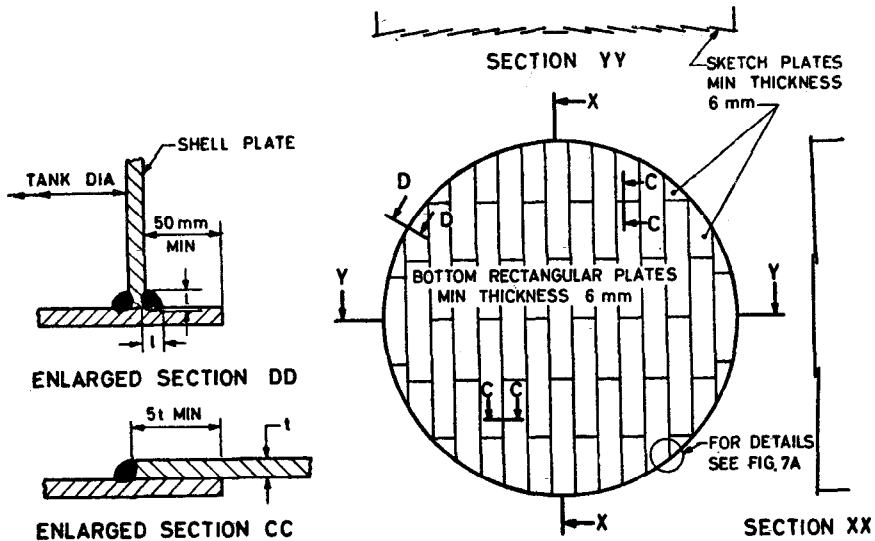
TYPICAL LAYOUT OF TANK BOTTOM
